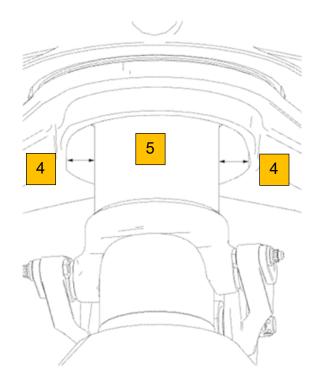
Examination of Clearance Between Inner Ring and Sleeve Assembly.
